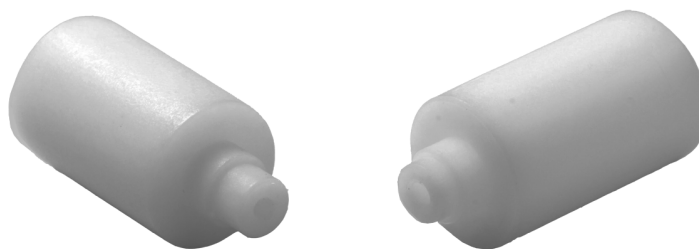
01-107M and 01-107F Soldering Fixtures
